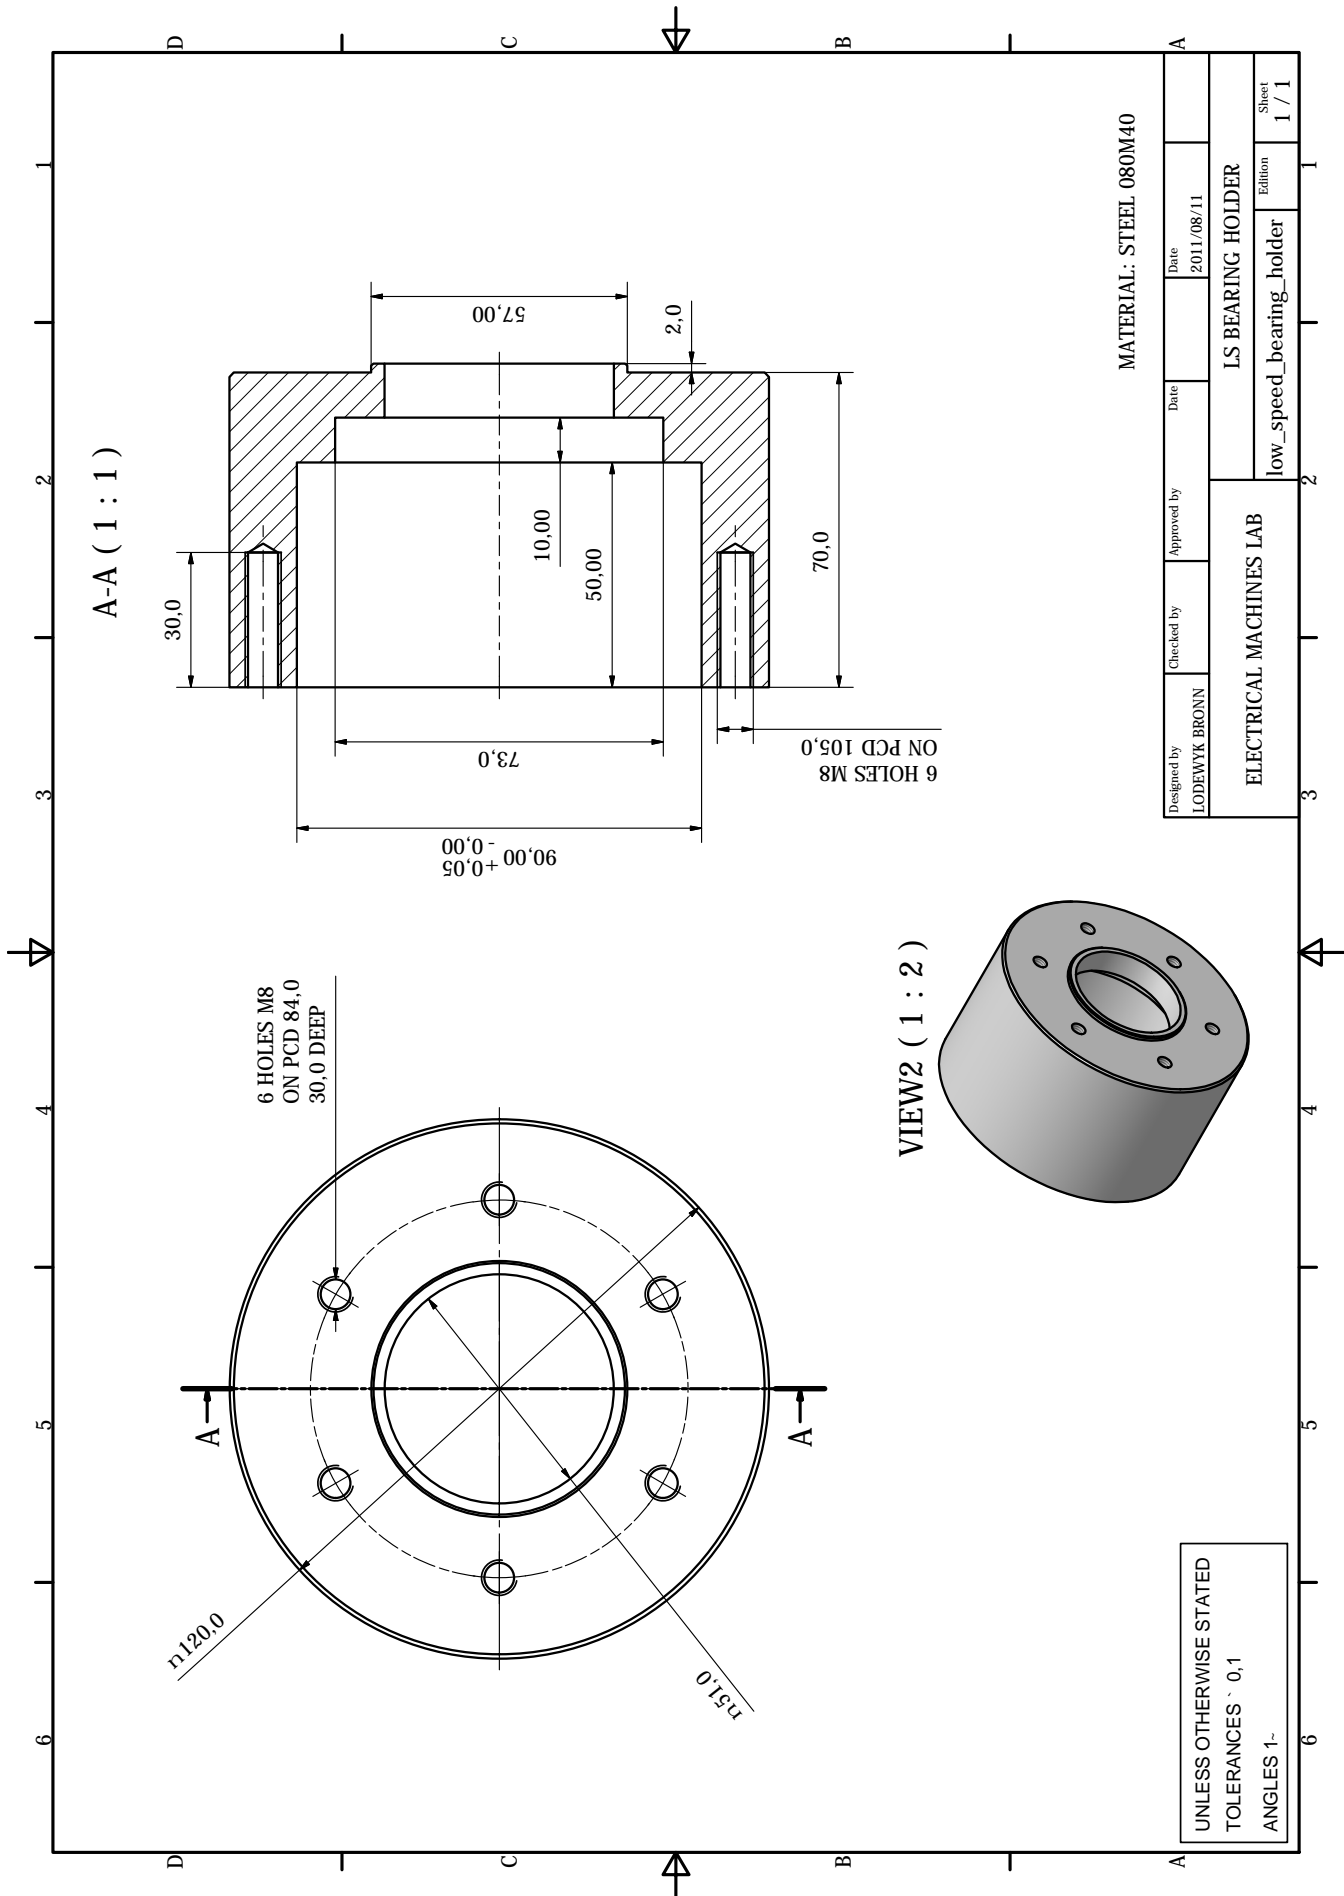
Modified Low Speed Bearing Holder to House new Tapered Roller Bearing
